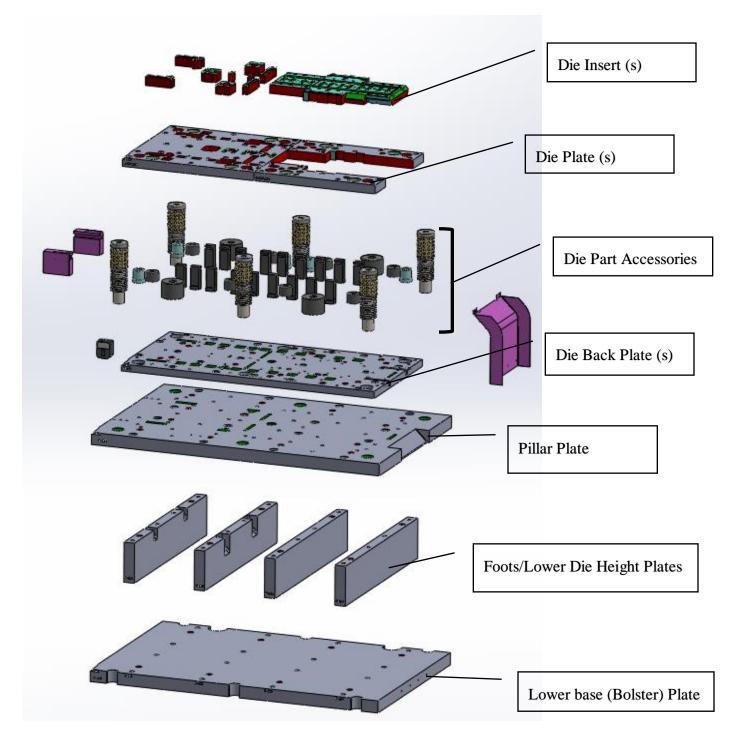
Assembly of Die Shoe/Lower/Bolster Shoe
